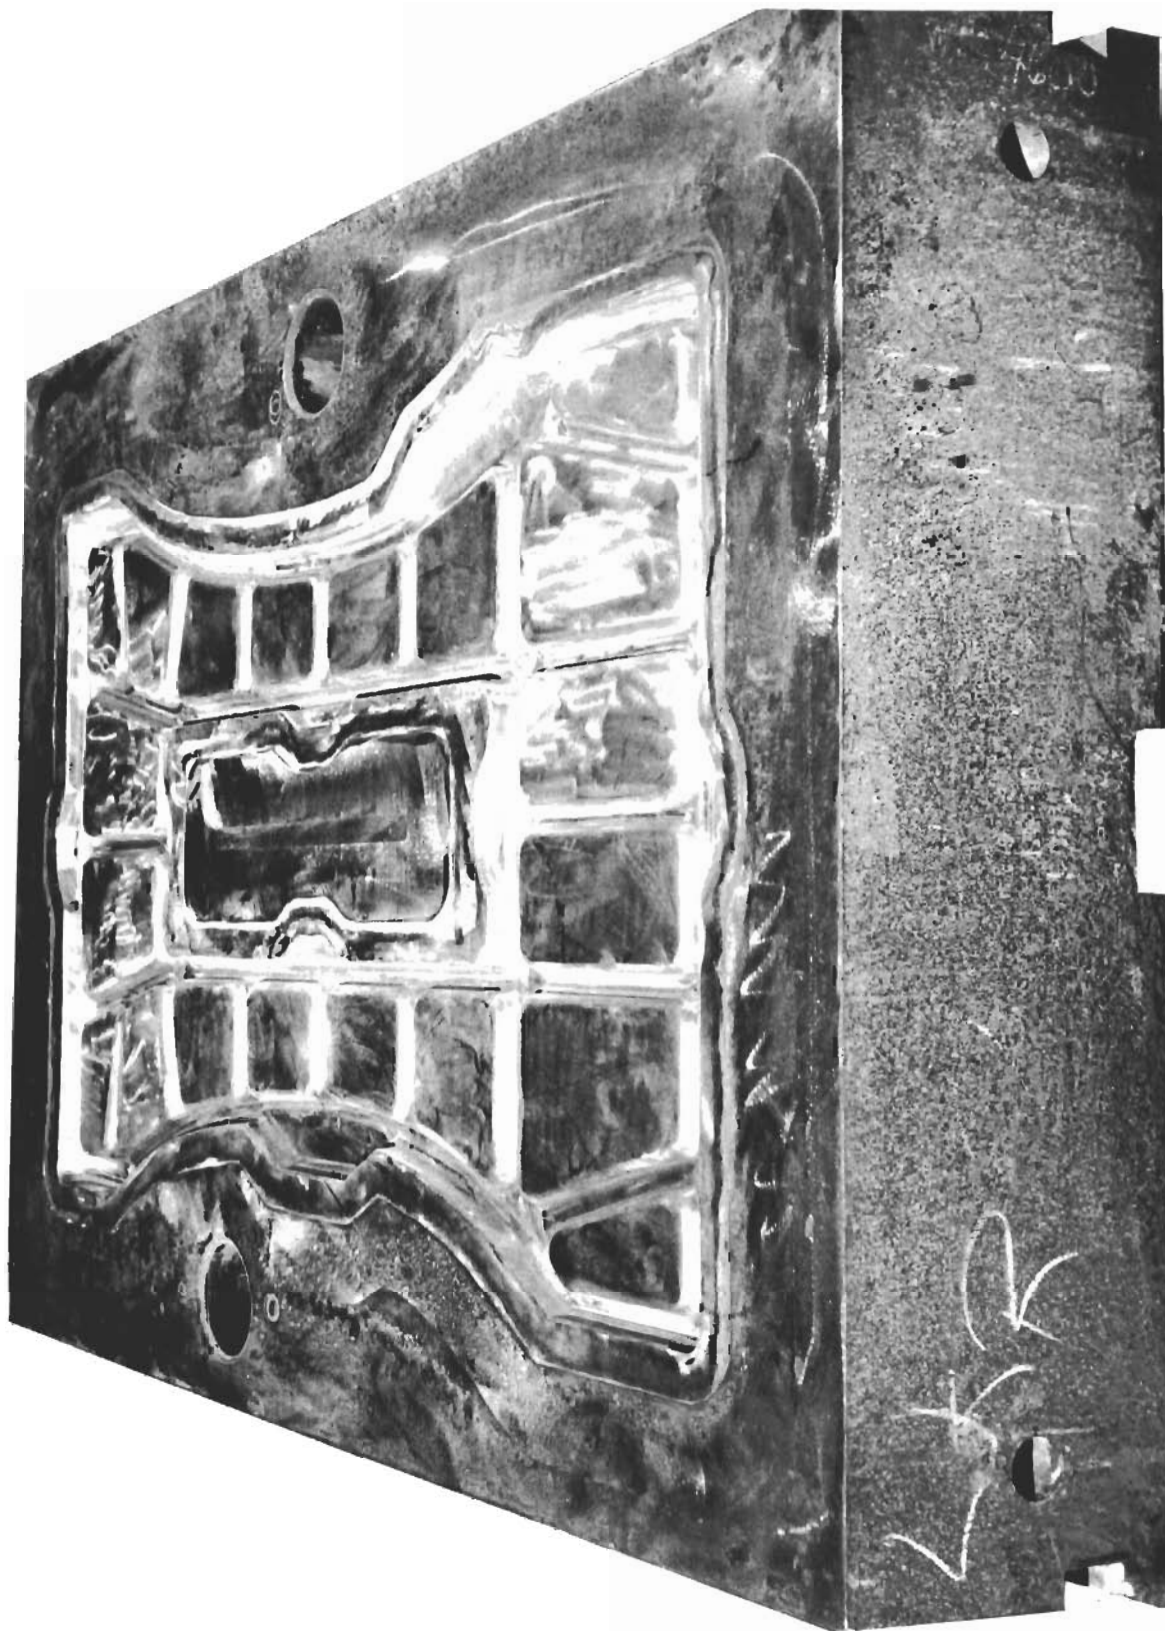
Lower Die for the Finish Bulkhead Forging Operation with the 50,000 Ton Hydraulic Press. Impression Polished and Photograph Taken after Completion of All Program Forging Efforts with the Press.
